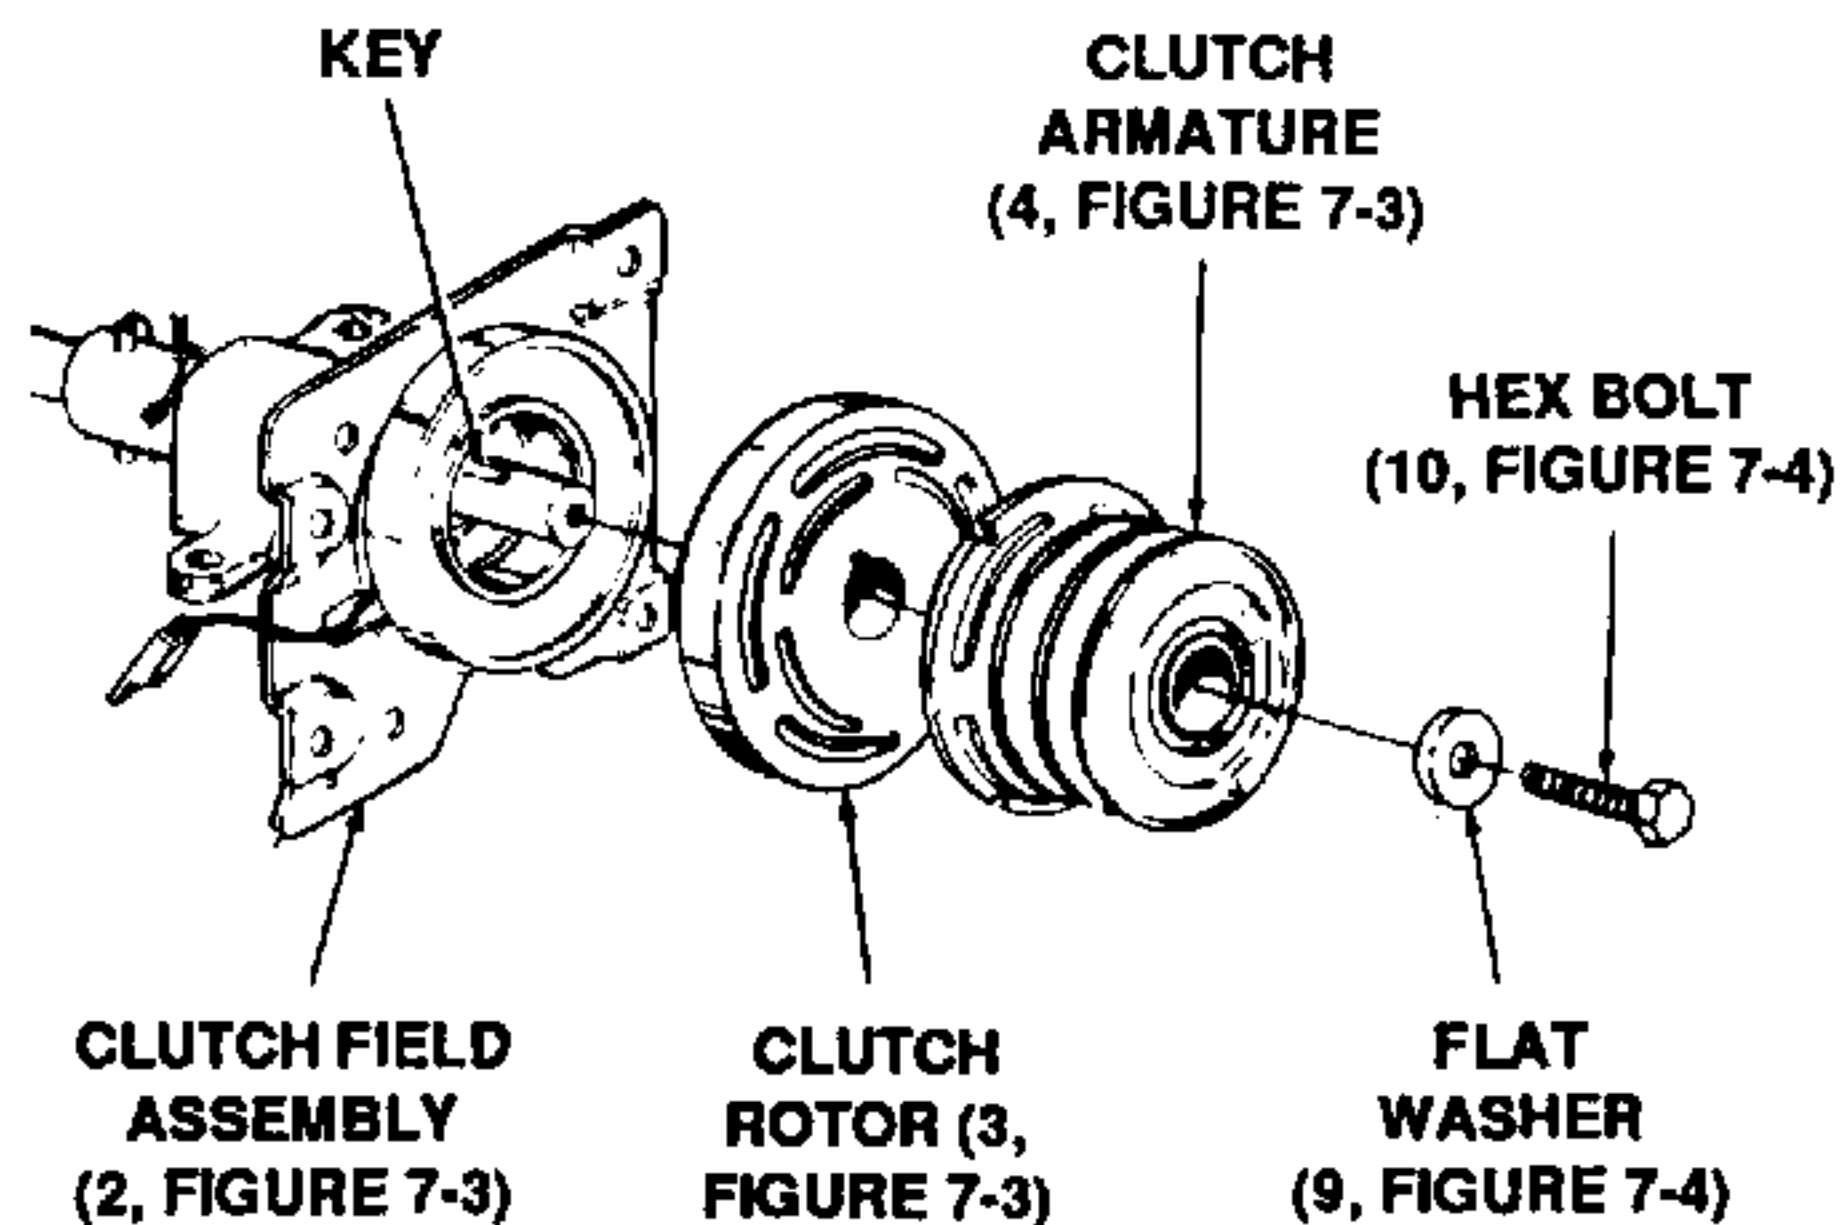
Installing Clutch Rotor on Rear PTO Clutch Shaft.
